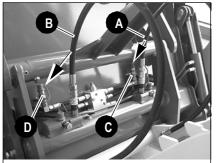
Connecting the hydraulic lines onto a multipurpose bucket
